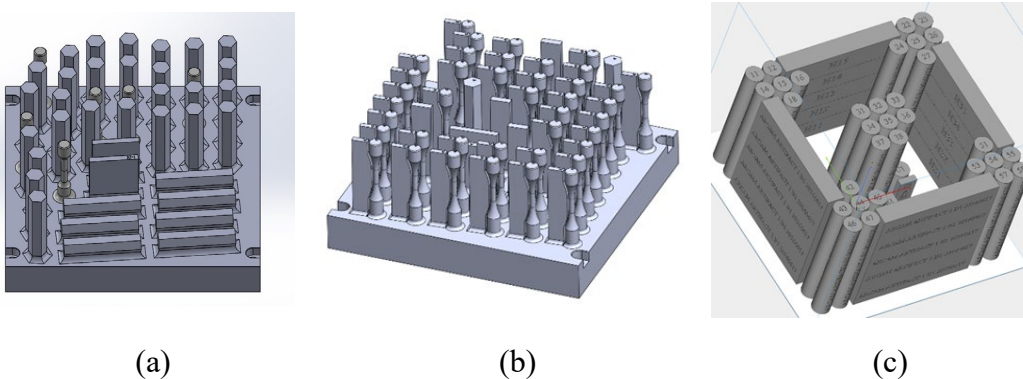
Specimen build layouts for (a) LPBF standard layout (b) LPBF layout for as-built surface specimens and (c) EBM layout.
